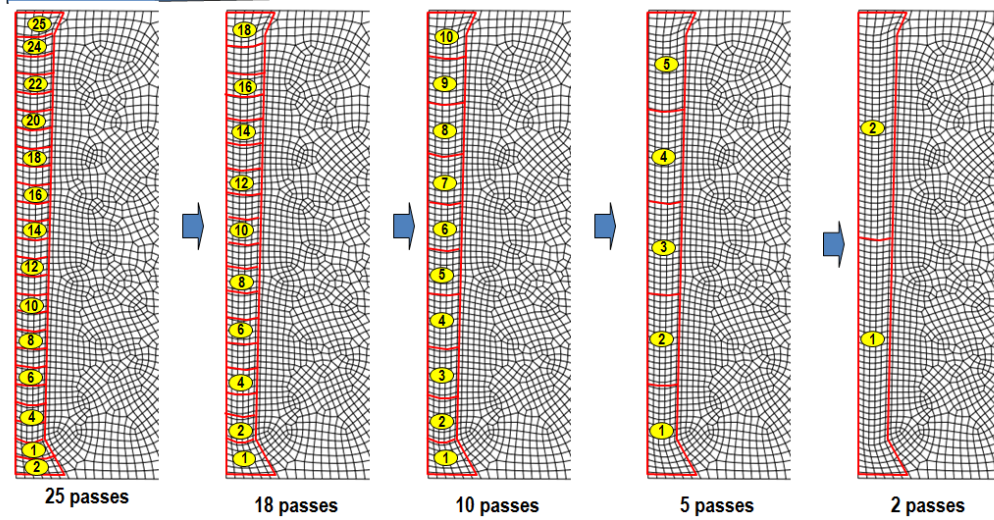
Five lumped models with pass number from 25 to 2 for NG 10" thickness welds: detailed pass size and welding sequence
